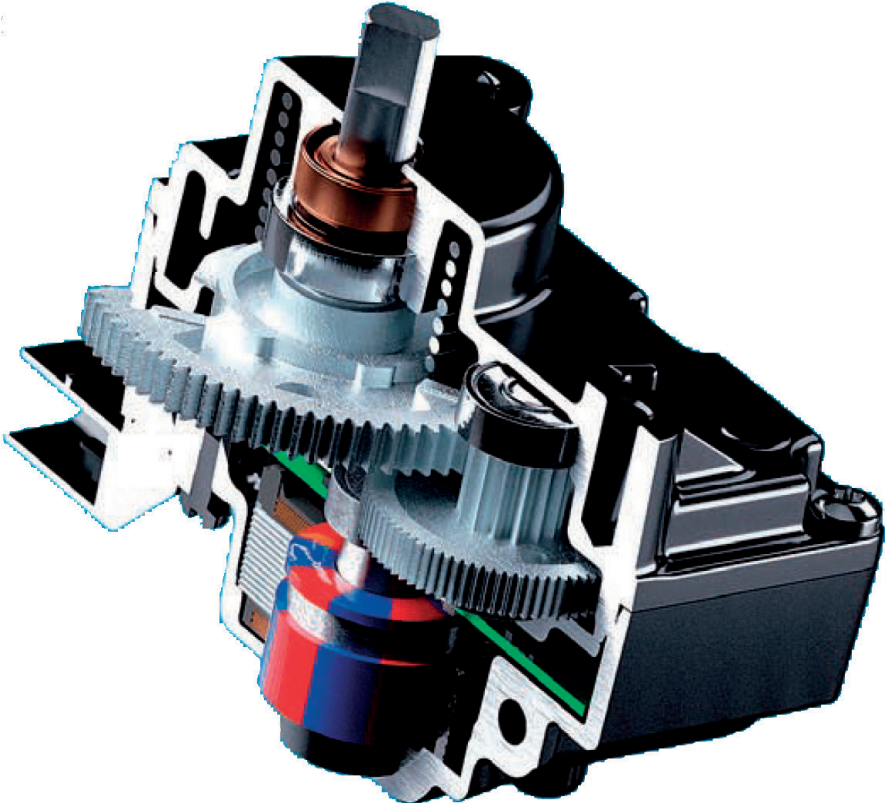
Kalman filtering demonstrator. Cut of the drive.
